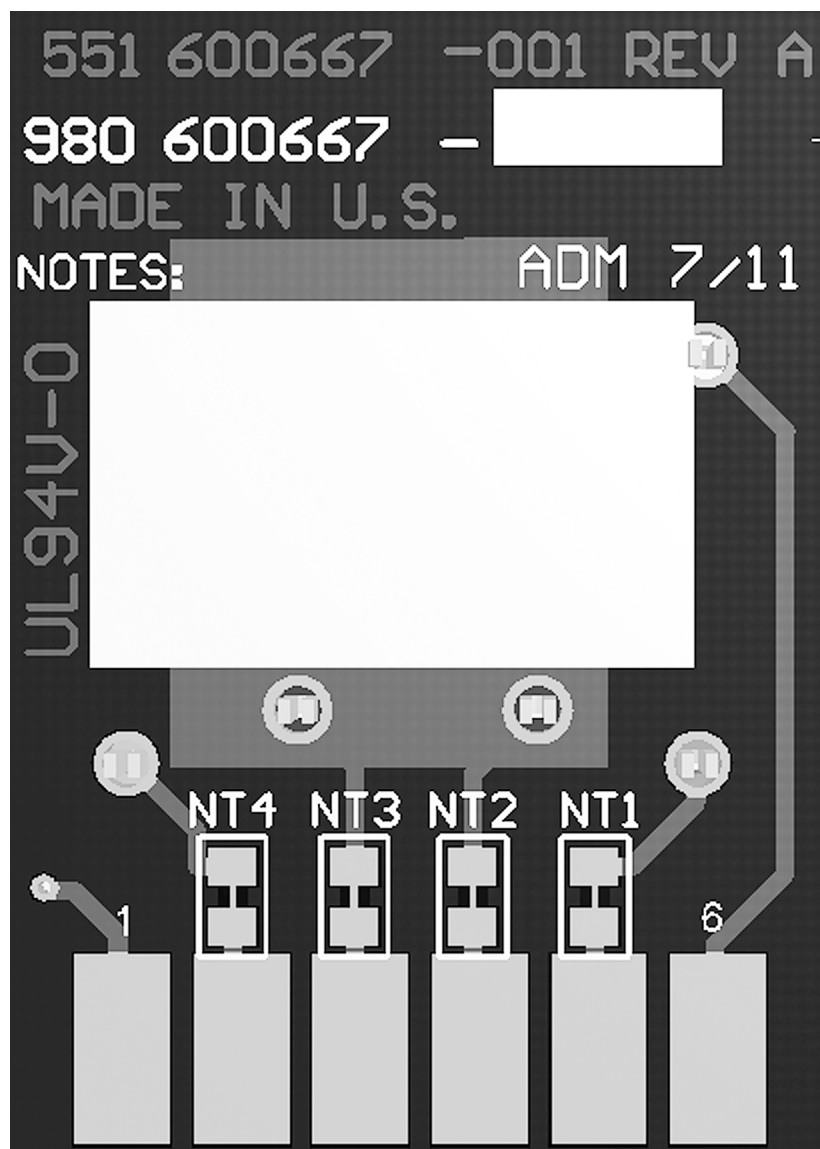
Bottom View, LMR14203/LMR14206 Demonstration Board
